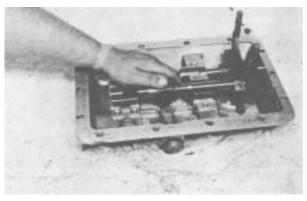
Remove 1st & reverse shift fork, rail and lug assembly.
